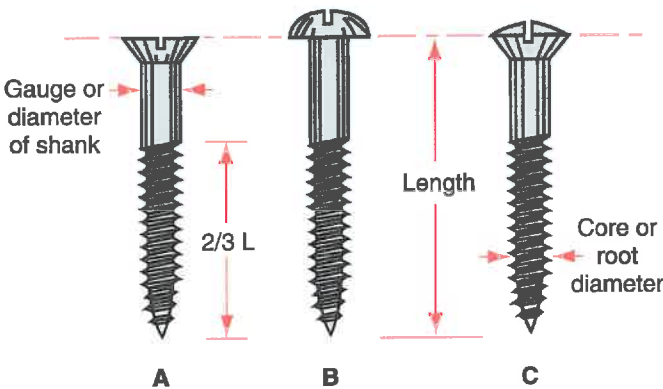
Select wood screws according to head shape, shank gauge, and length. (Forest Products Laboratory)
